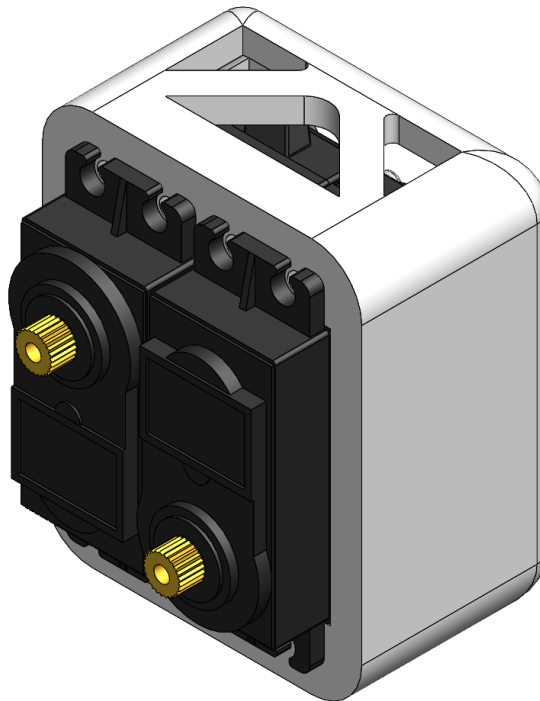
Hip Joint Assembly with Dual Motor Configuration
